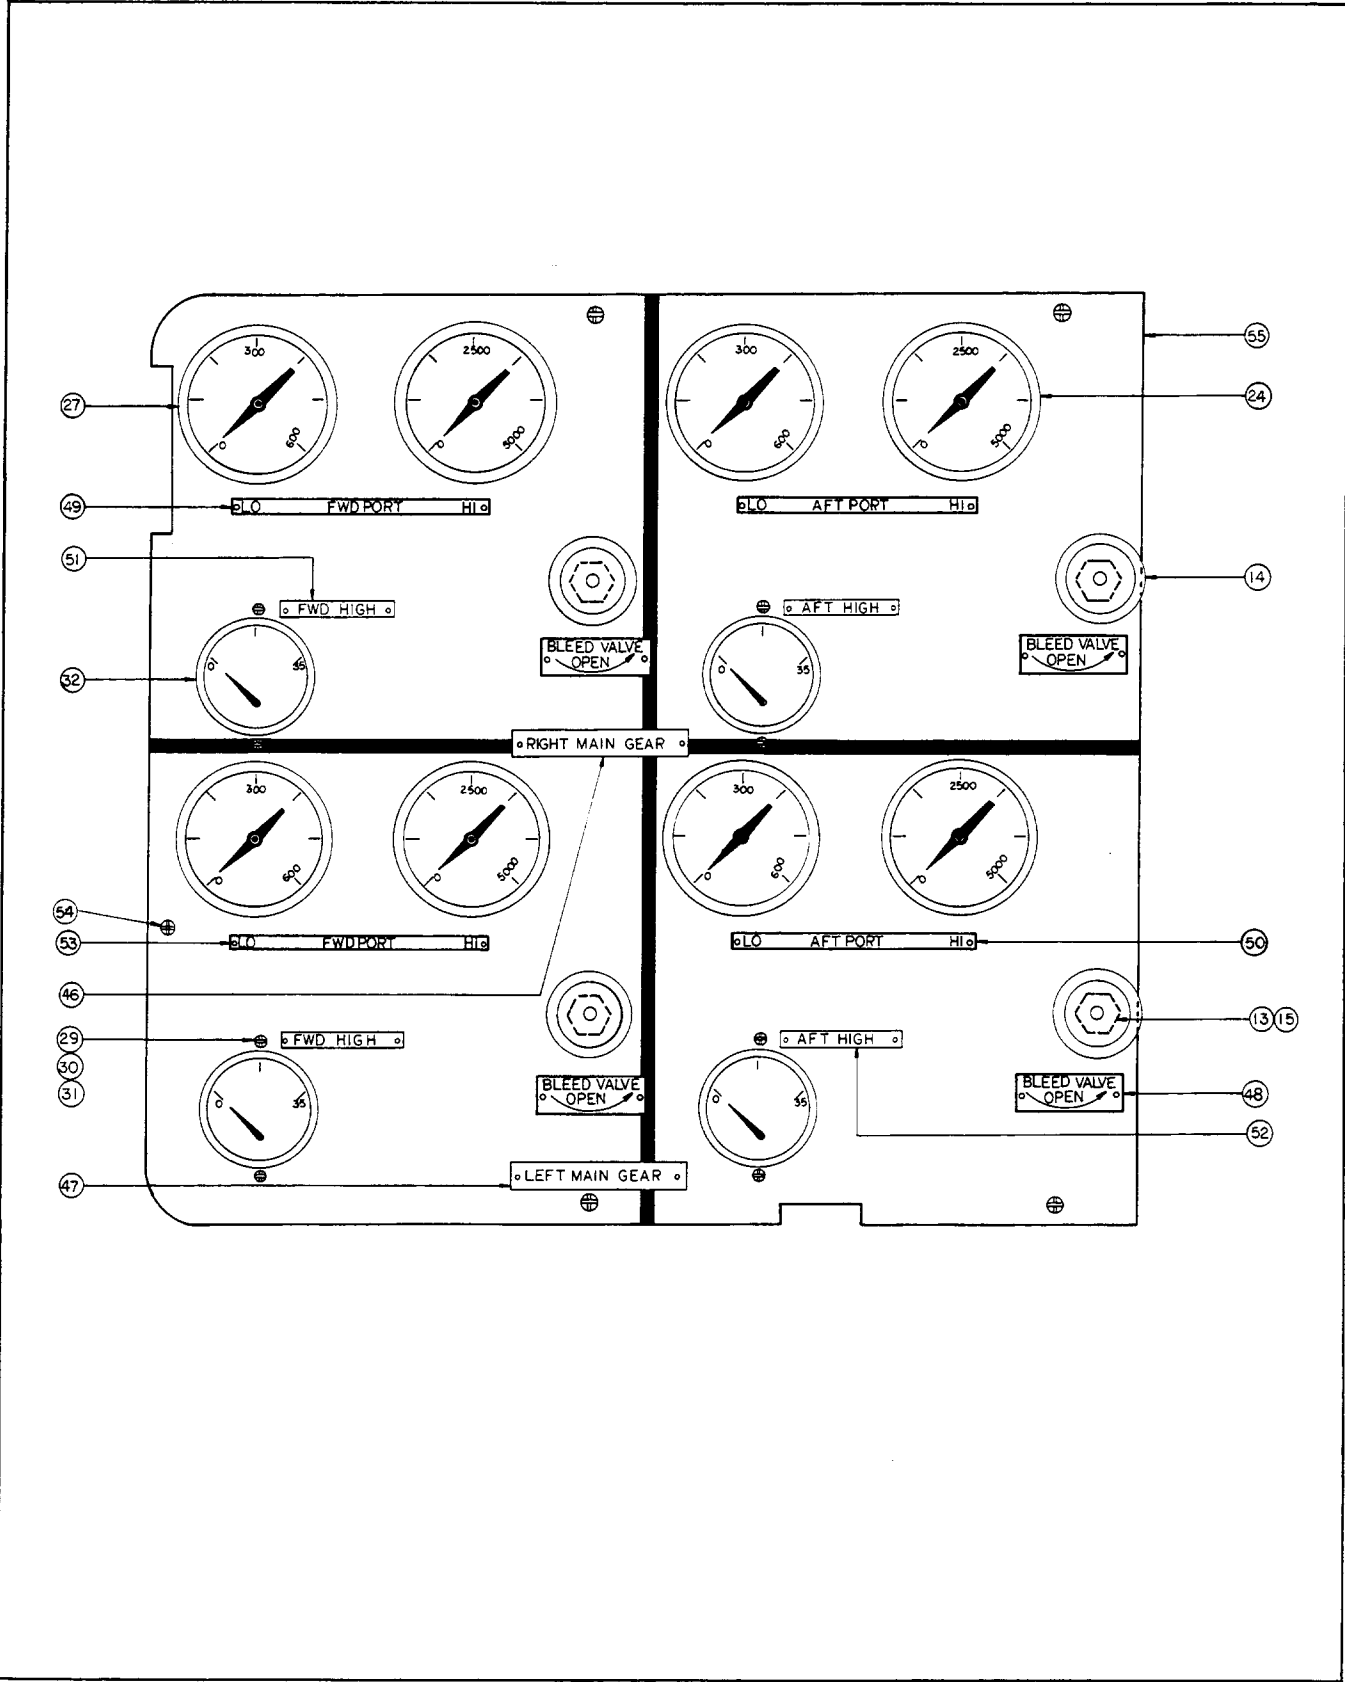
Panel Assembly (Sheet 1 of 3)
